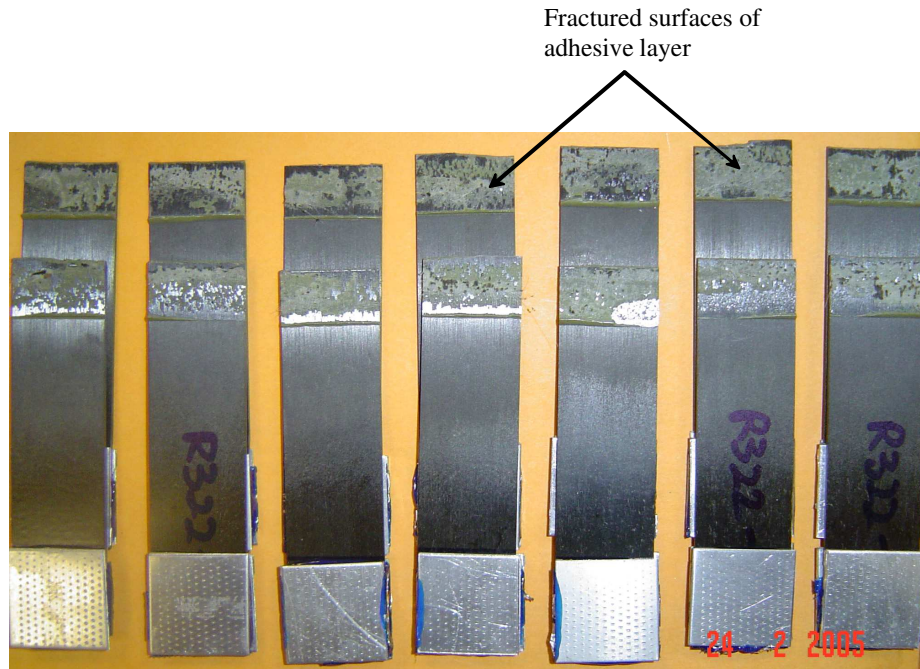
Photograph of fractured surfaces of adhesive in the single lap joint (SLJ) test specimen.
